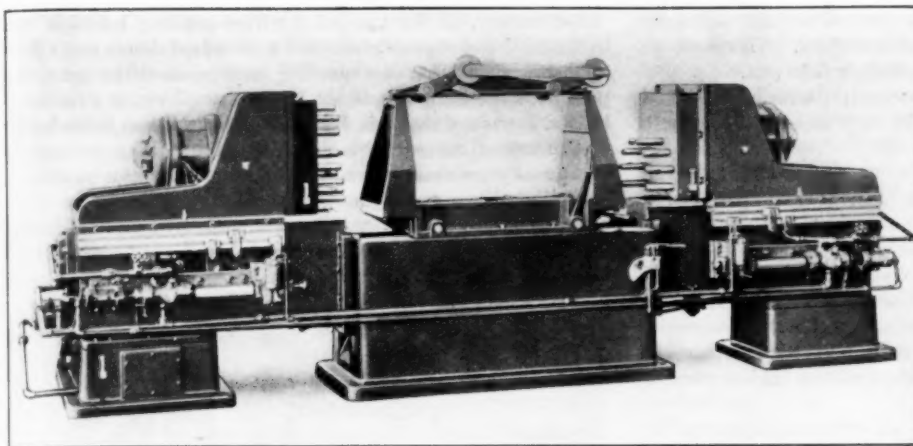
ONE TYPE OF TWO-WAY MACHINE CONSTRUCTED FROM 6-IN. UNITS
